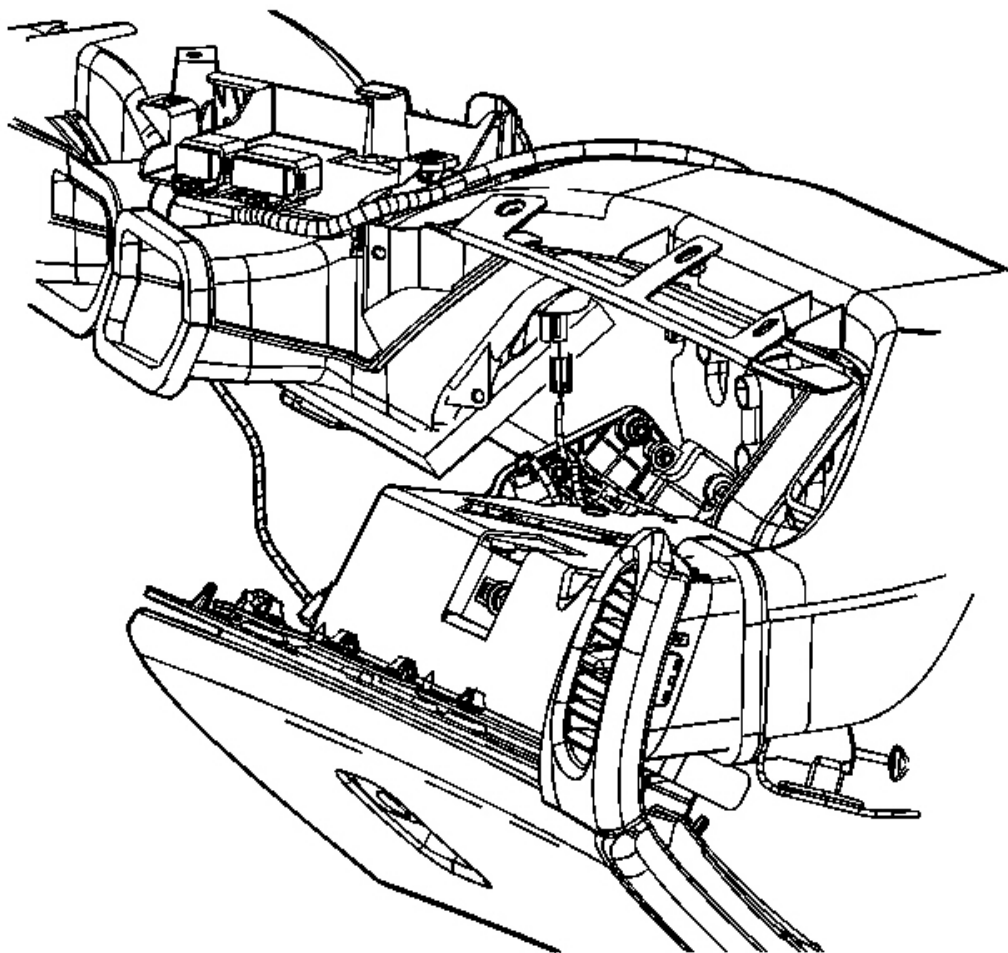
Right Upper Air Temperature Sensor Electrical Connector
